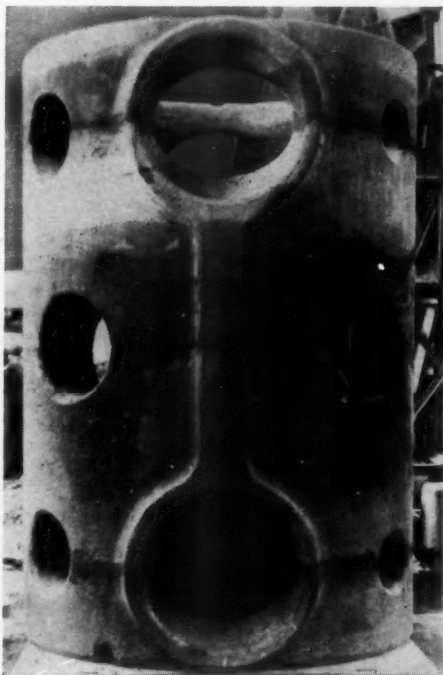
(LEFT) ASSEMBLED JACKET CORE FOR GAS ENGINE CYLINDER.
